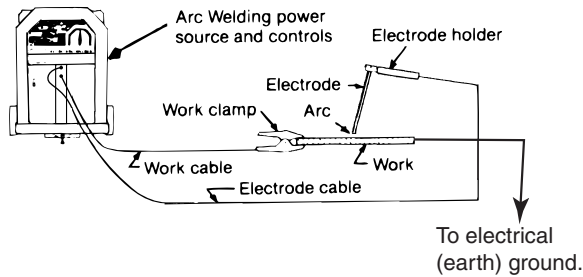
The welding circuit for shielded metal arc welding.
